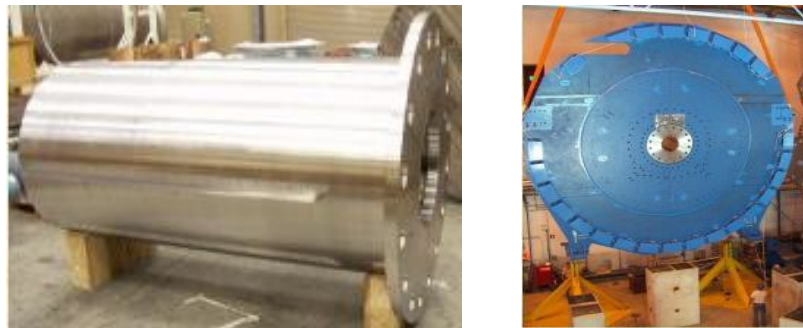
Left: The stainless-steel tube. Right: The front of the JD Shielding [22].
